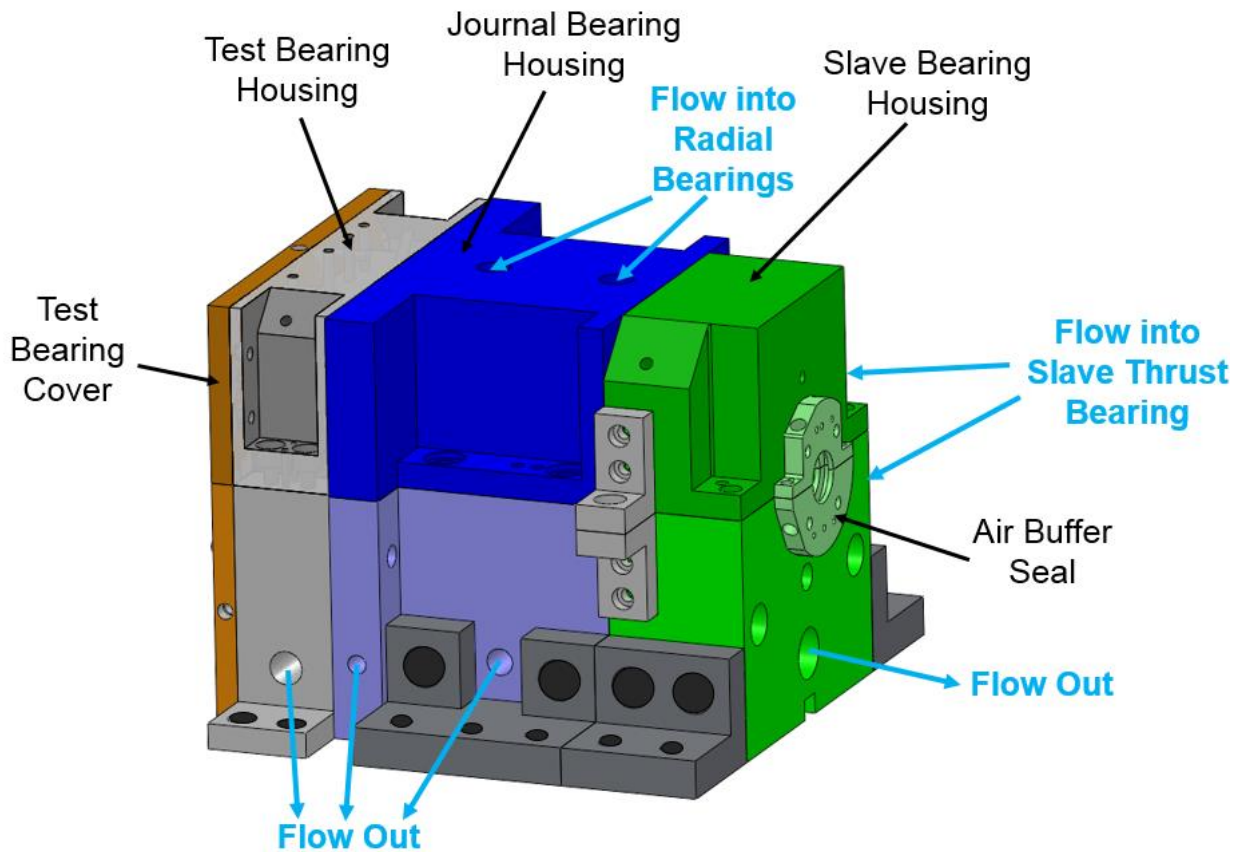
Assembly of journal bearing housing, slave bearing housing, and test bearing housing.
